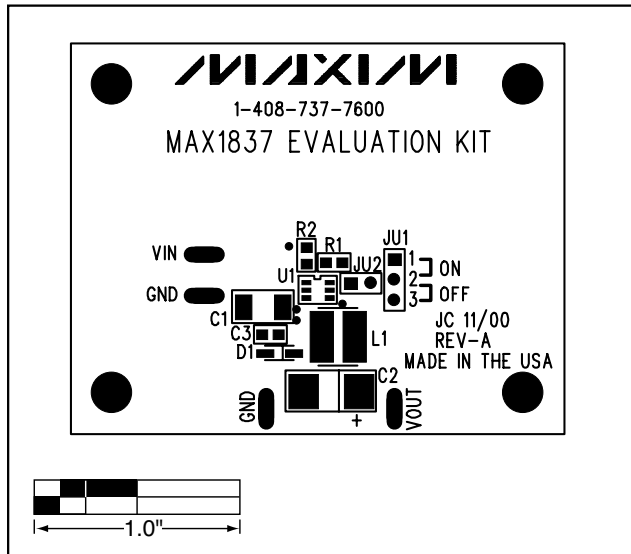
MAX1837 EV Kit Component Placement Guide—Component Side
